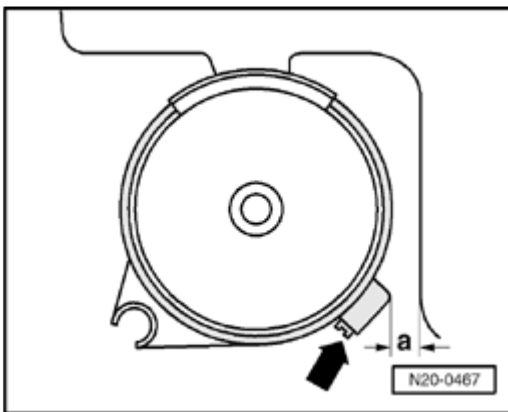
Installation Position Of Screw-Type Clip Relative To Fuel Filter Bolt
